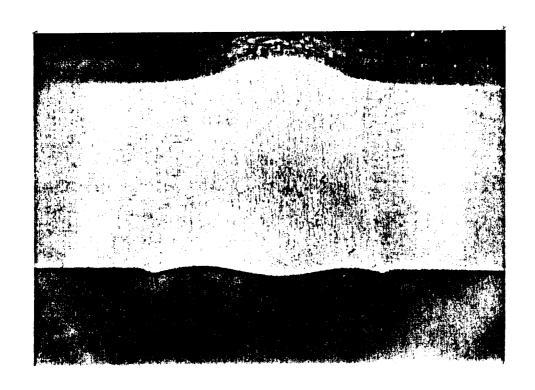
B Weld made with 100 ppm Methane in shield. Keyhole. Back.
